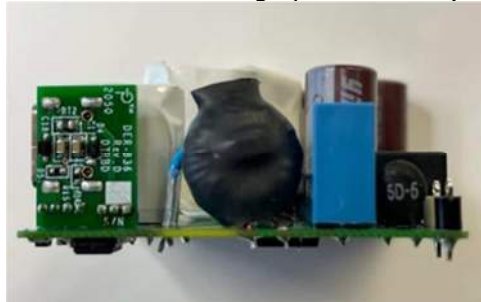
Populated Circuit Board Photograph – Side (H: 21 mm).
